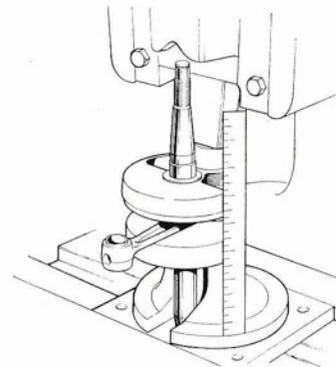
Using steel rule to align crankcheeks prior to final assembly.
